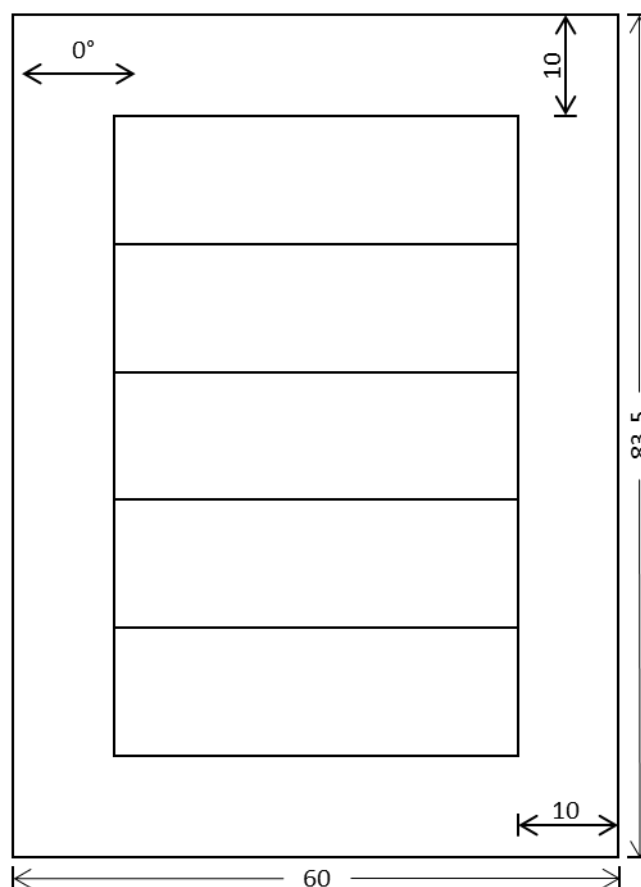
Positioning of the coupons on the test panels for flexural test. All dimensions are expressed in mm.
